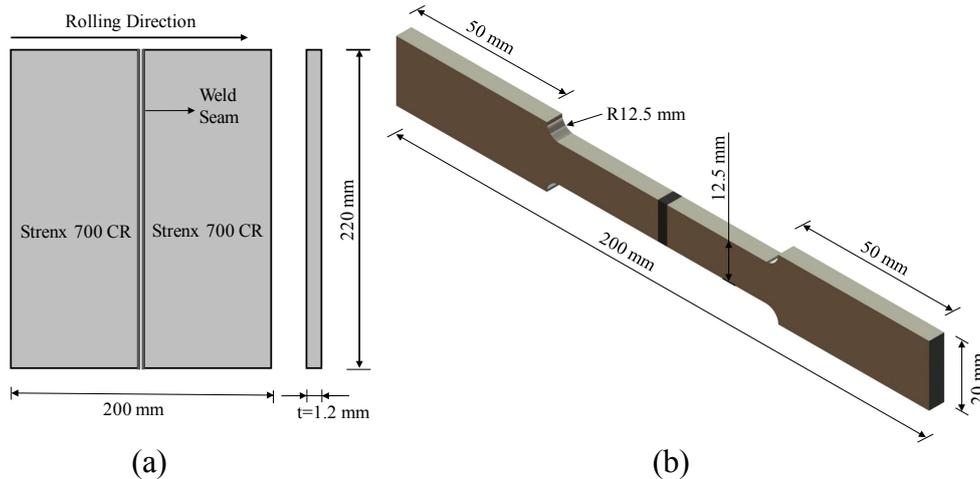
(a) Schematic representation of laser welded sheets, (b) Tensile specimen produced in accordance with the specifications (ASTM, E8/E8M)[18]
